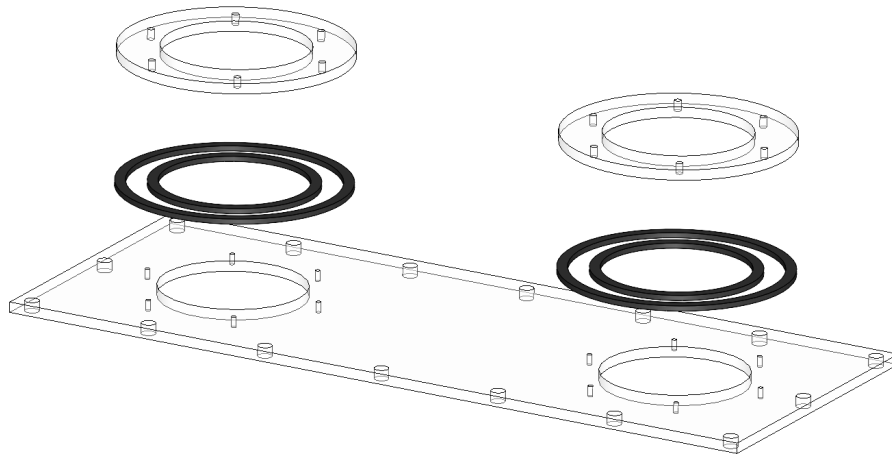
Acrylic pieces used to construct the glove door assembly.
